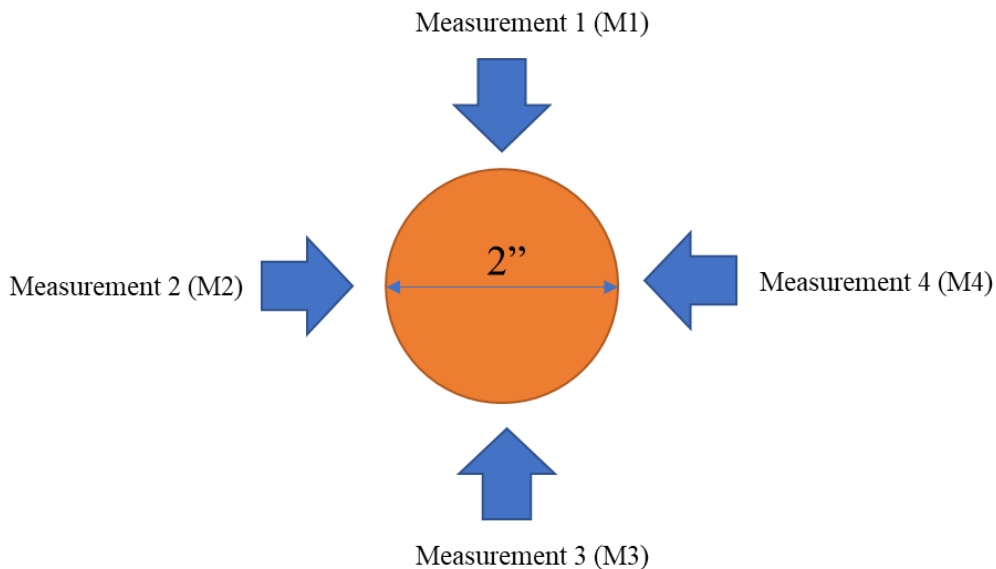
Schematic setup of surface finish measurements on the workpiece (feed direction is into the plane of the page)
